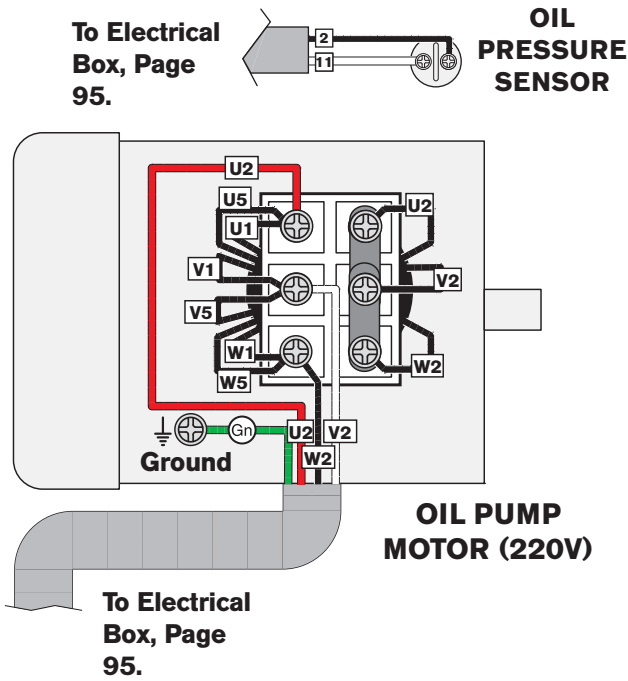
SB1016 Oil pump motor & pressure sensor location.
